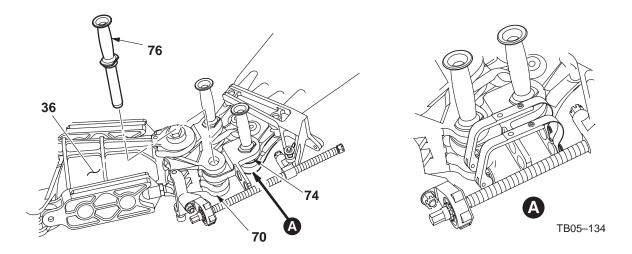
Install Quick Release Fold Pin in L/H AFT Blade Block and Lead/Lag
